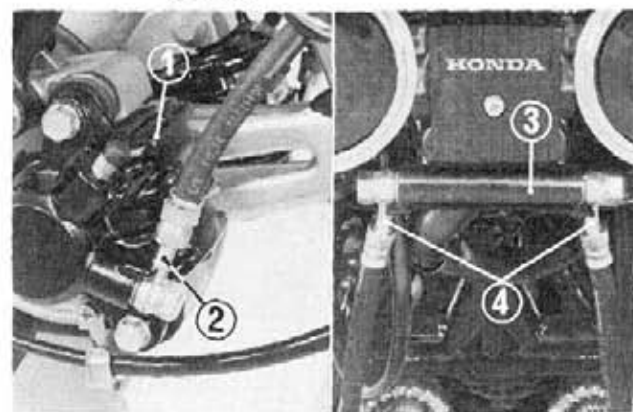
① Caliper ② Straight side ③ Three way joint ④ Bent side
